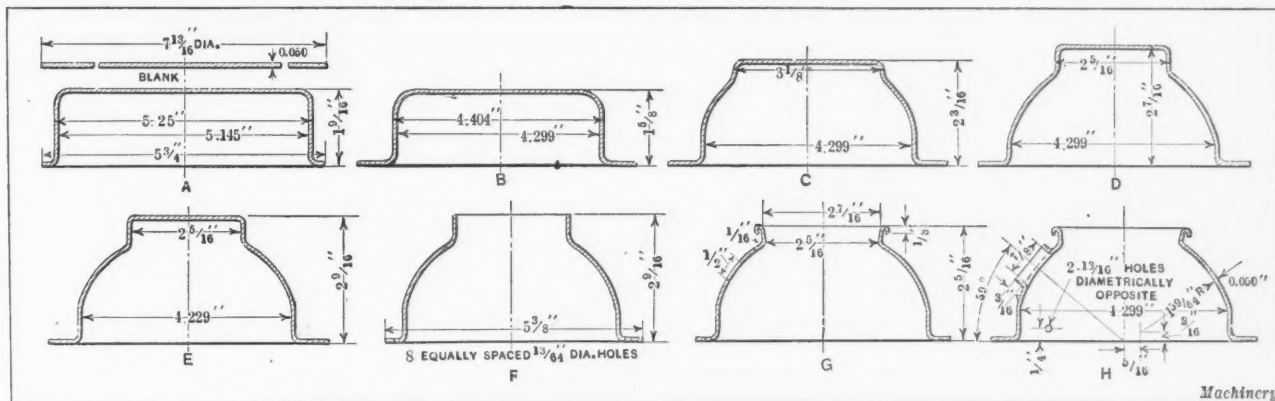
Dimensions of the Universal Joint Boot after the Performance of Successive Operations
